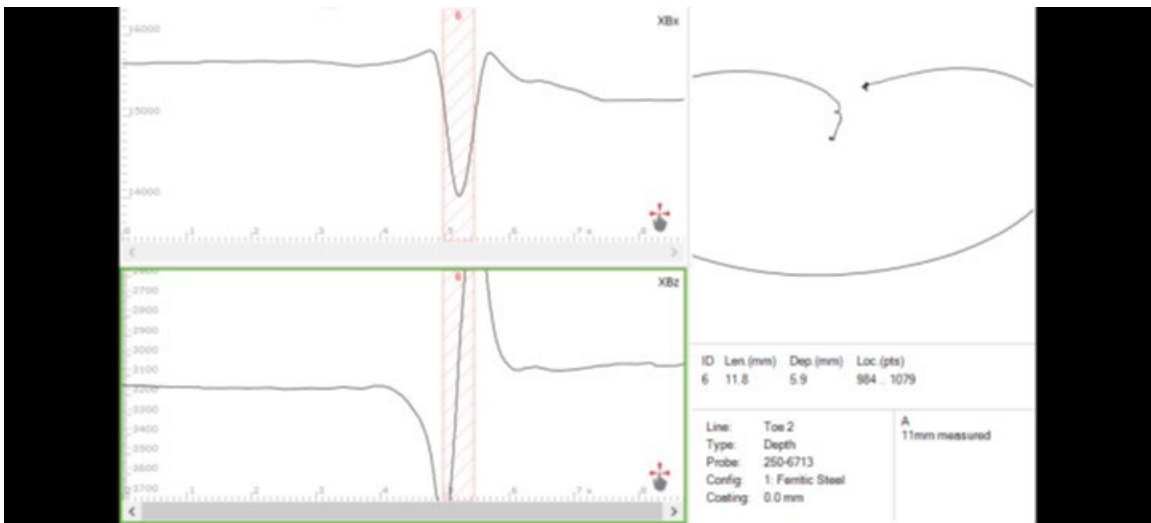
ACFM scan data of Flaw 6 for TTCI-2 butt weld MG panel
